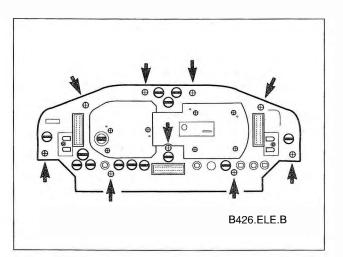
Instrument cluster viewed from rear showing cover mounting screws (arrows).
